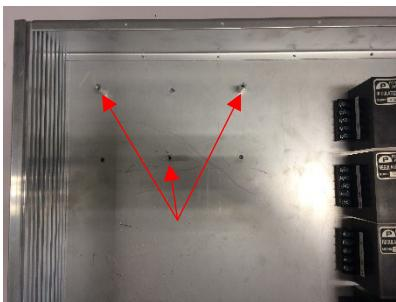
Baseplate with three standoffs installed. Note that the image shows the other three holes drilled - these will be unused and unnecessary.
